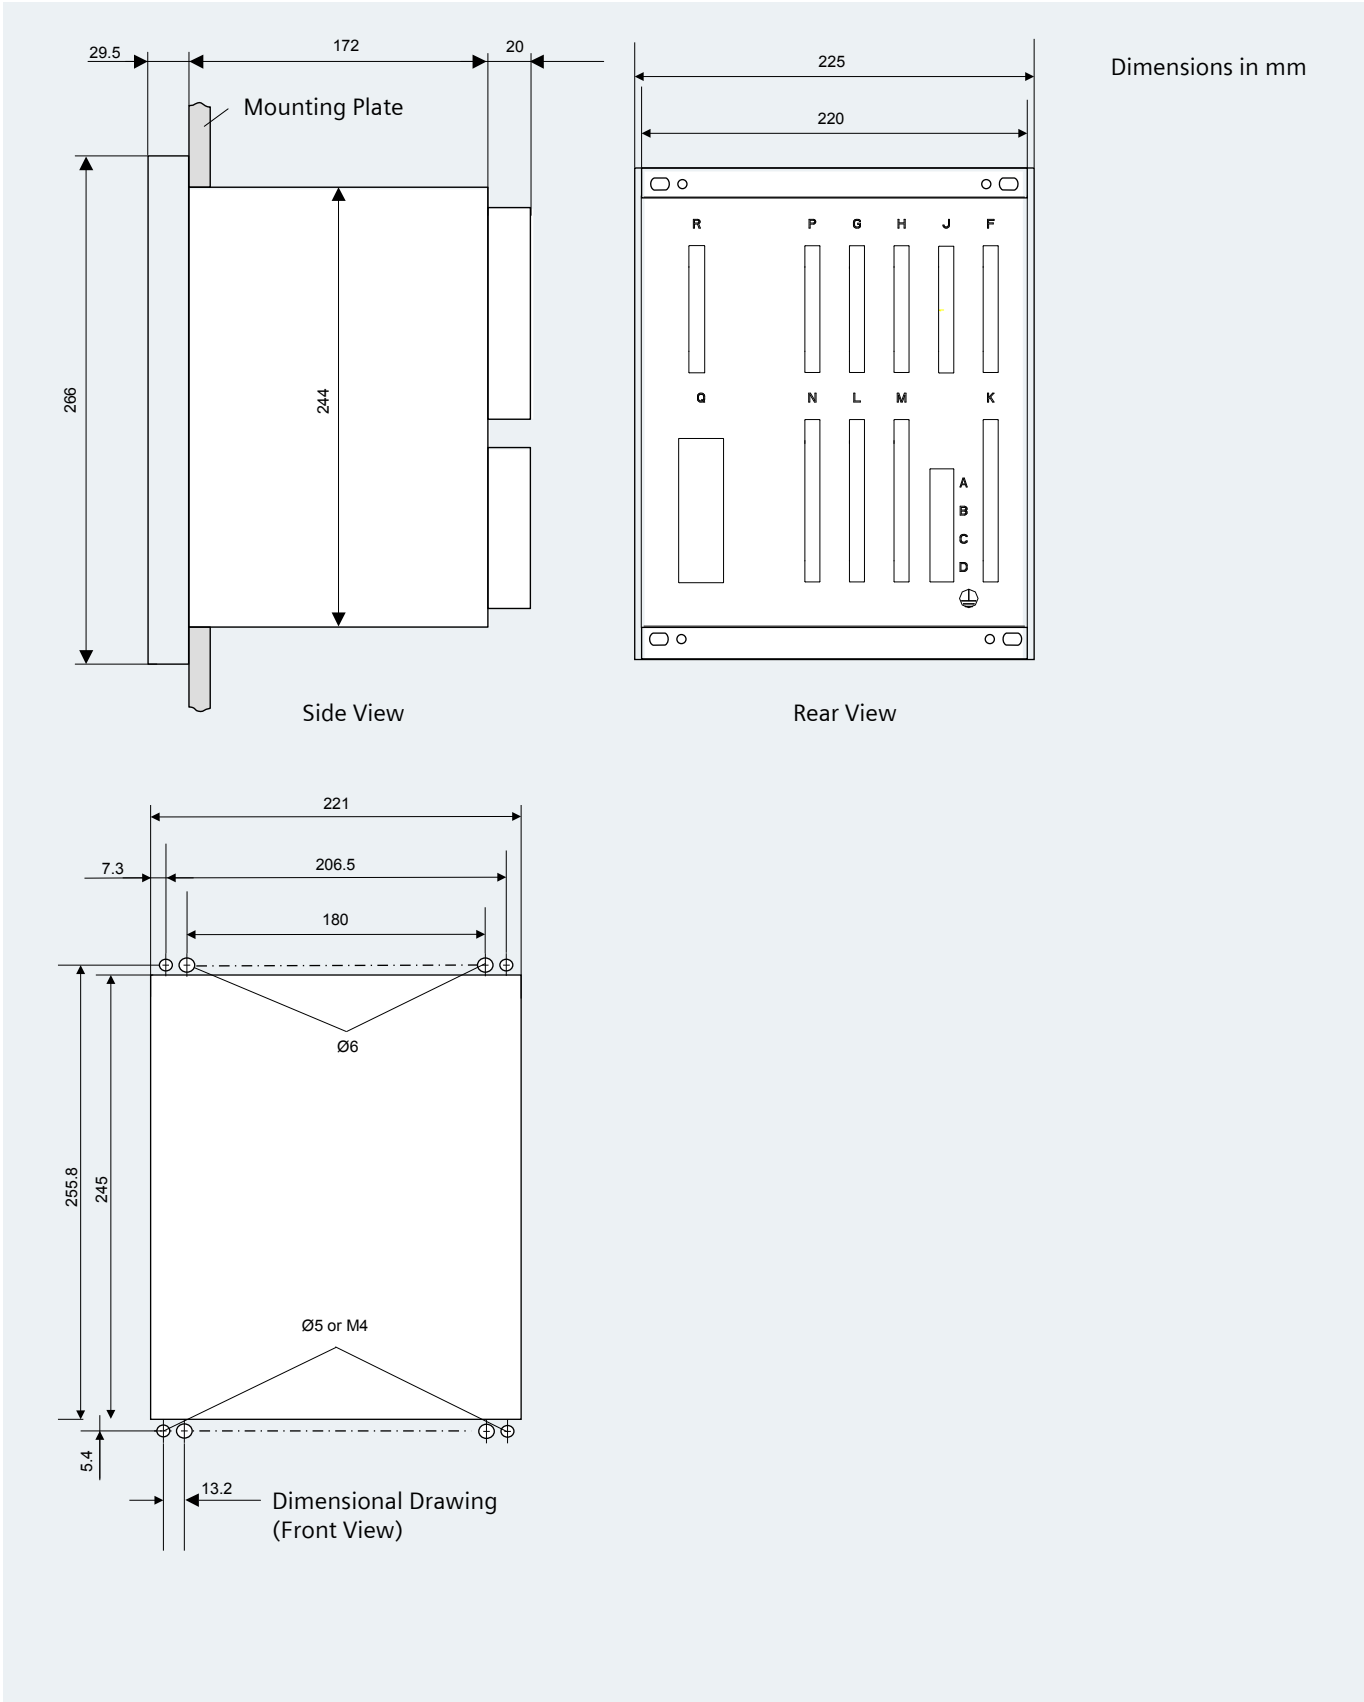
/119 Dimensional drawing of a SIPROTEC 7SJ66 (housing size 1/2)
